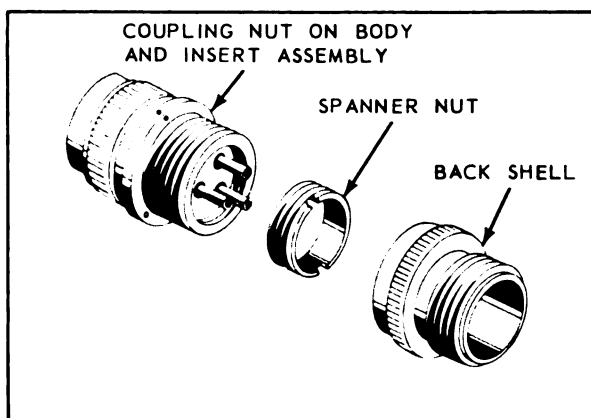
Bendix Fireproof Connector Partial Disassembly
